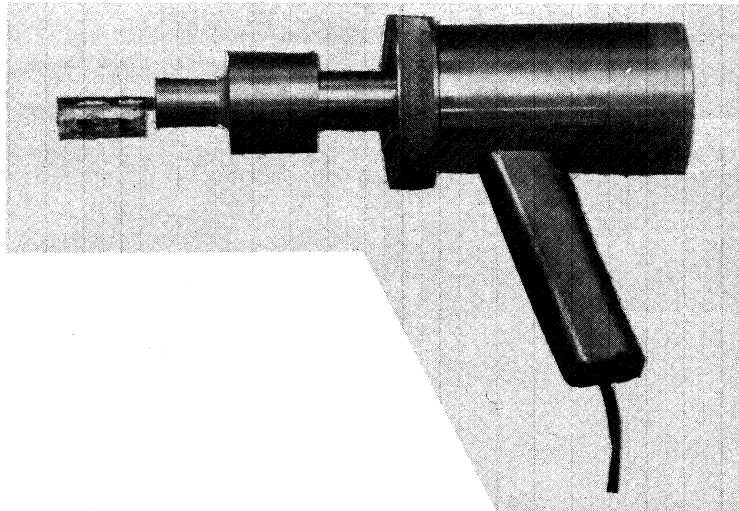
Hand held transducer and horn assembly with saw blade tool mounted.
